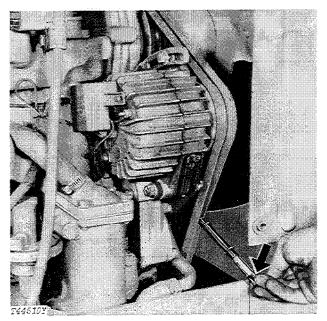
Adjusting Alternator Belt Tension (Tension Tester)
